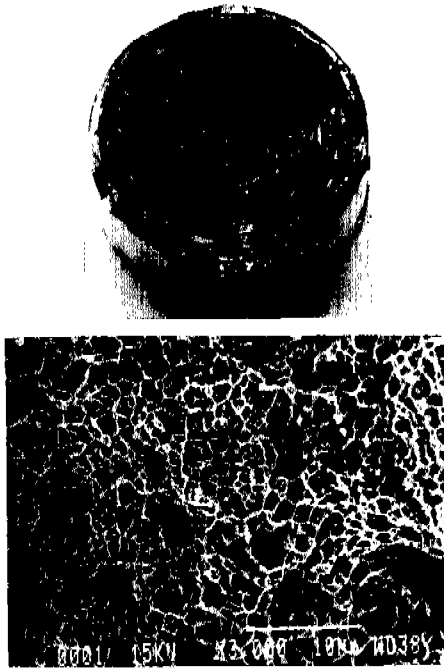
Fracture surface of MA754 friction weldment produced under the condition of (Friction Pressure/Friction Time/Upset Pressure)=(100 MPa/3 sec/200 MPa), showing a typical fracture in the bonded interface.
